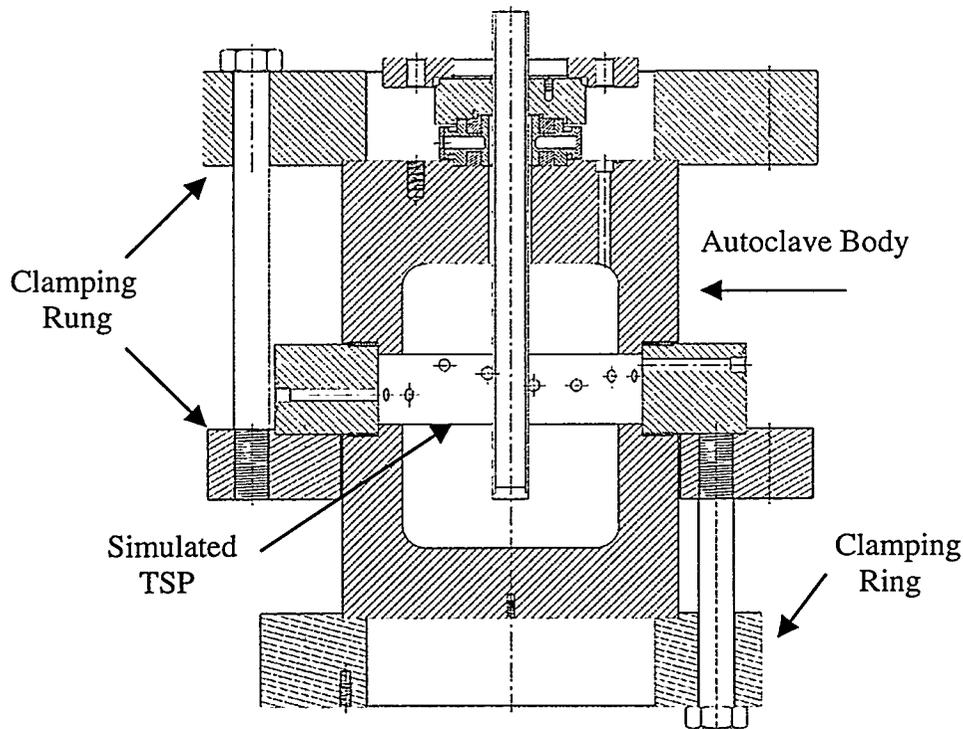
Schematic of the heated crevice with inserted steam generator tube.
